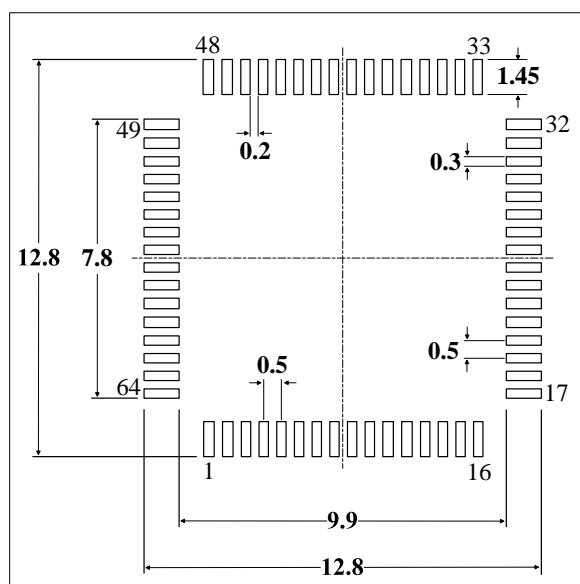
Suggestions for LQFP64 (10x10mm) package solder pads⁽¹⁾
